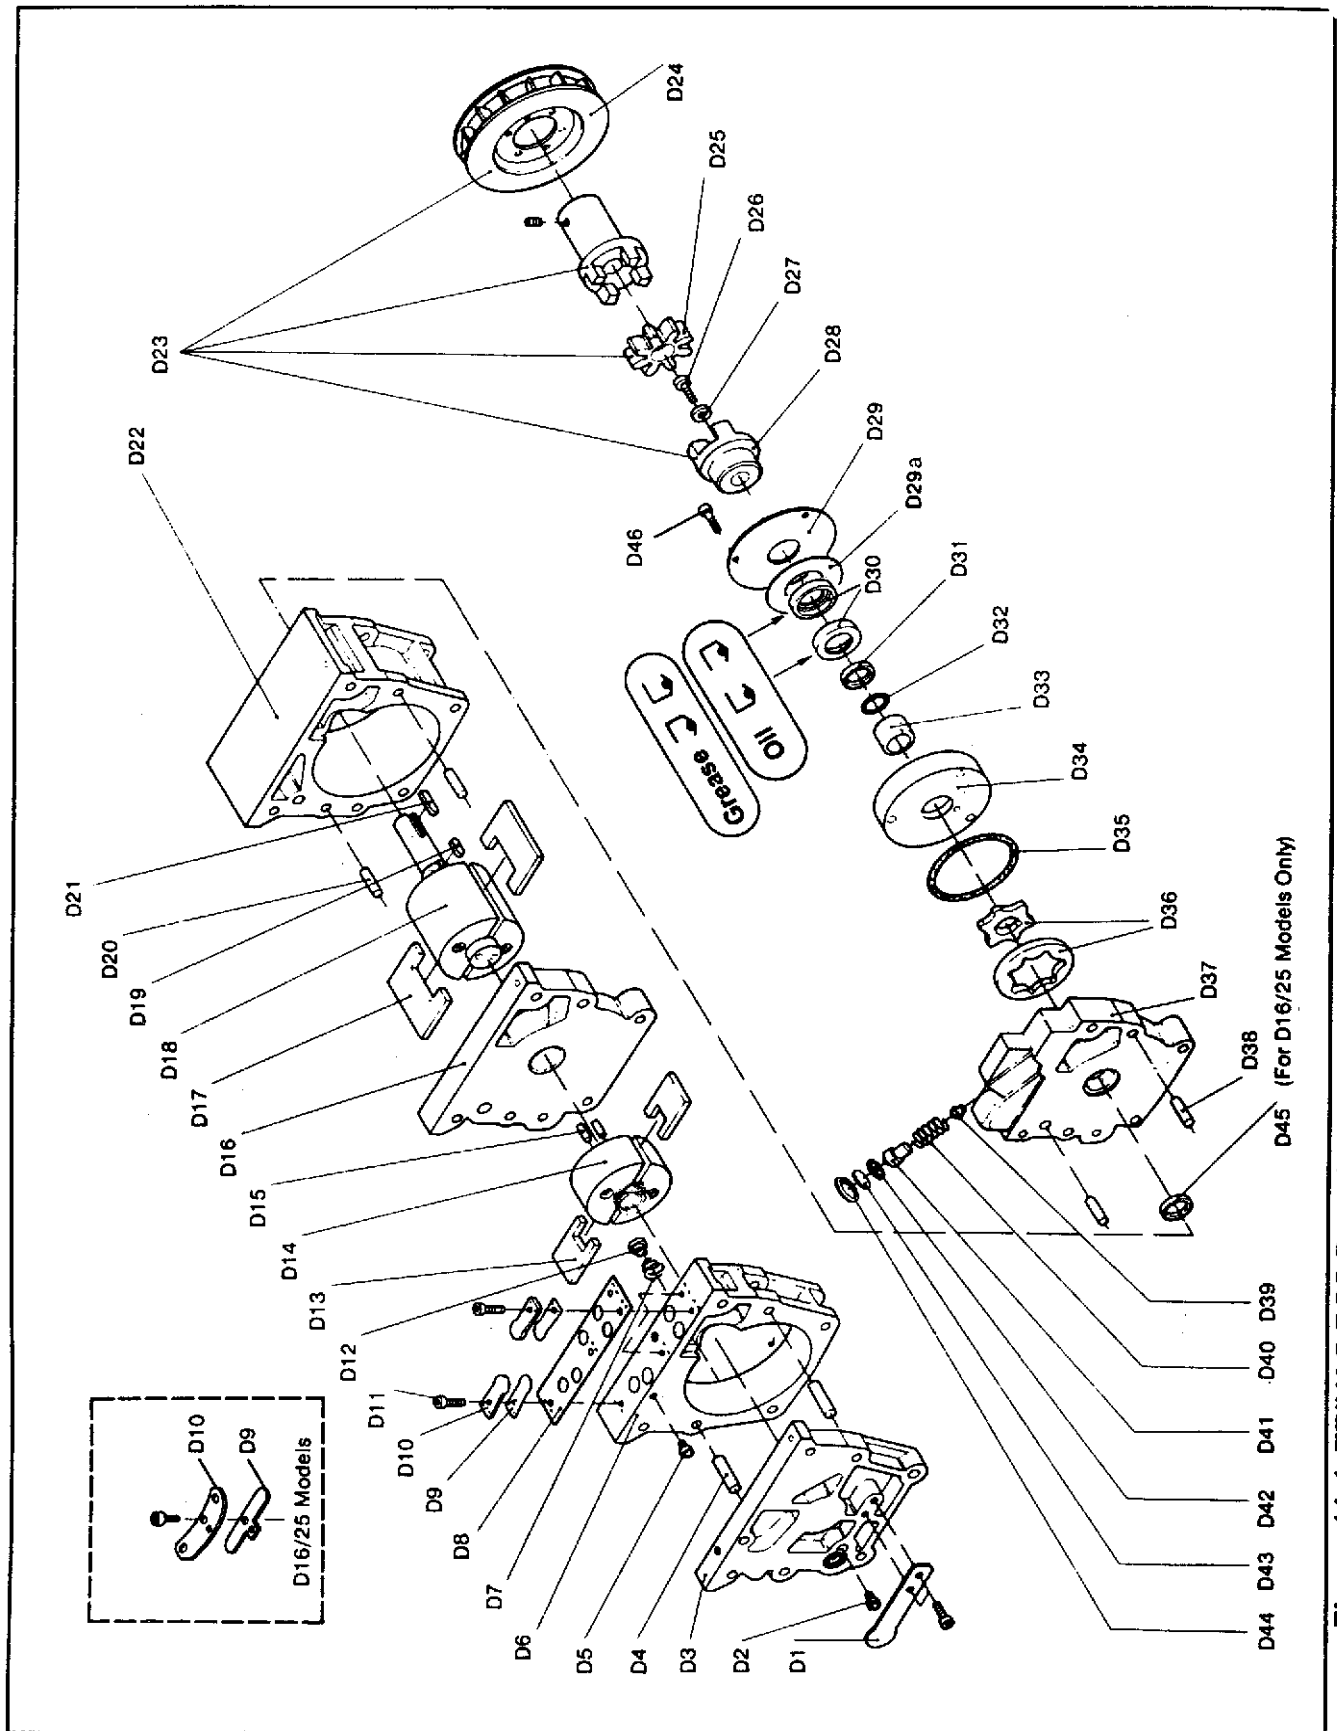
TRIVAC BCS Pumping Module (see Table 11-A for the part number of the complete pumping module assembly)
